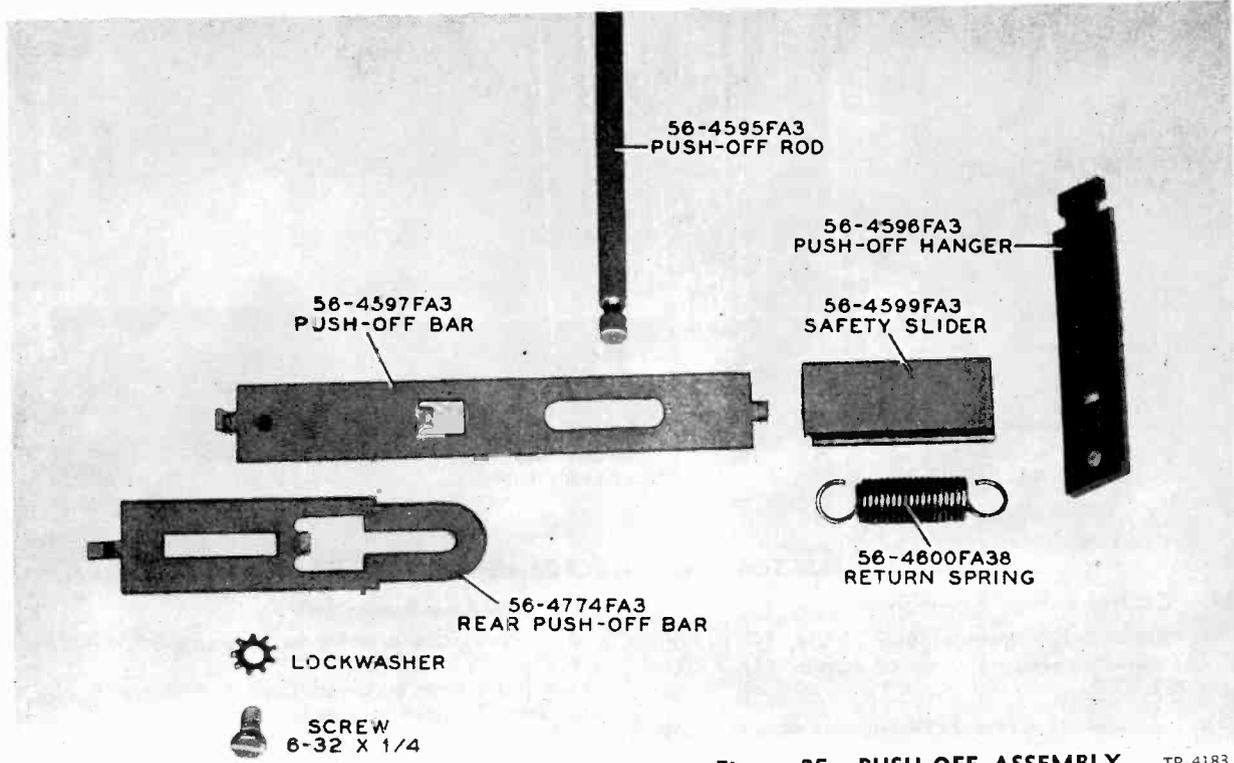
PUSH-OFF ASSEMBLY TP-4183
